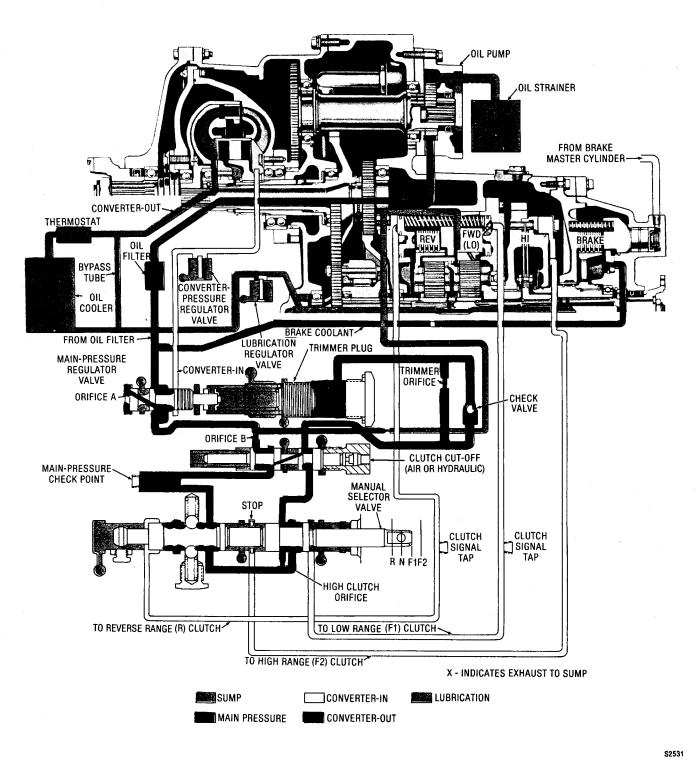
TTB 2221-1, TTB 2421-1 hydraulic system with clutch cutoff control
